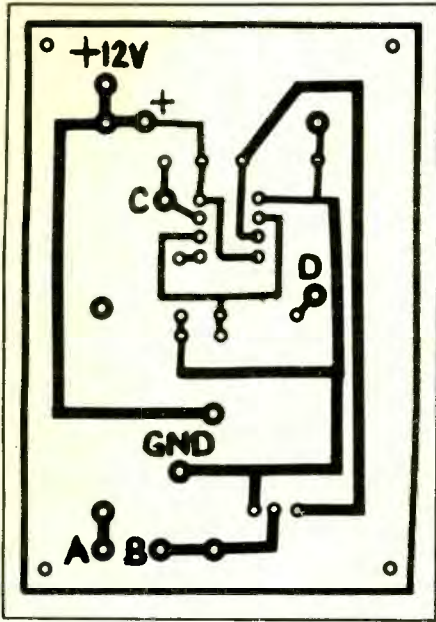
Actual-size etching-and-drilling guide for pc board.
